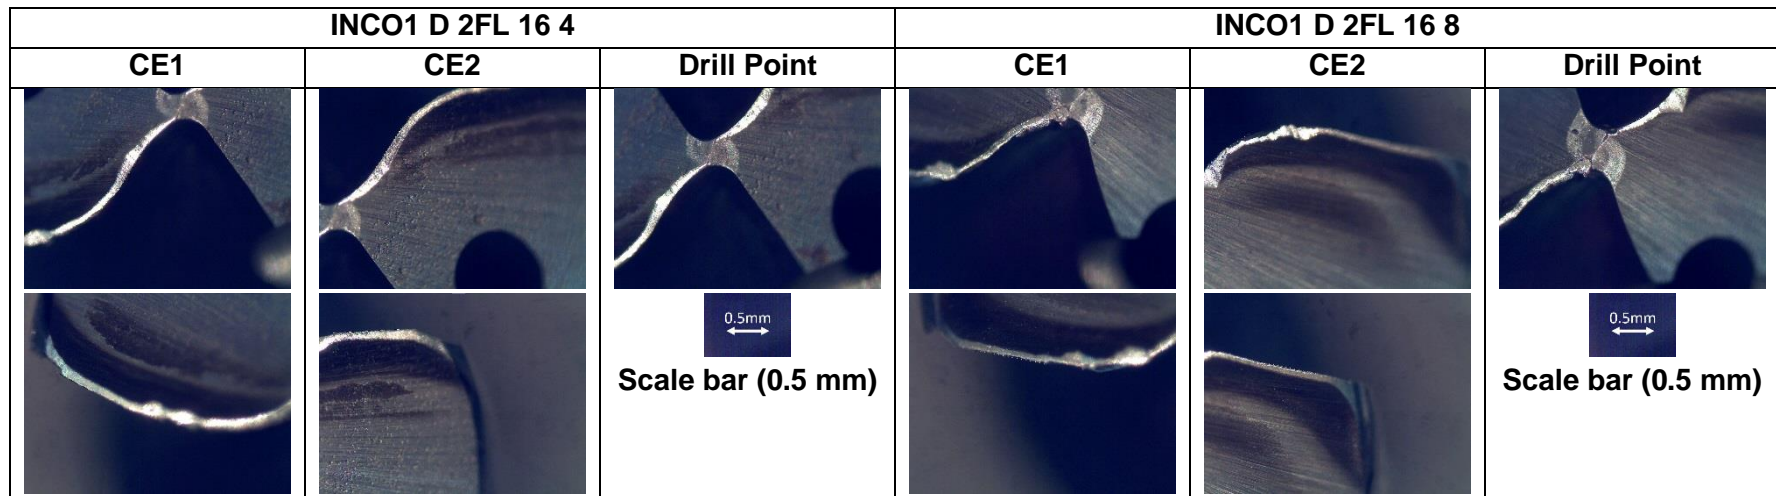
Examples of flank wear and flank wear on the chisel edge in drilling of Inconel 718
